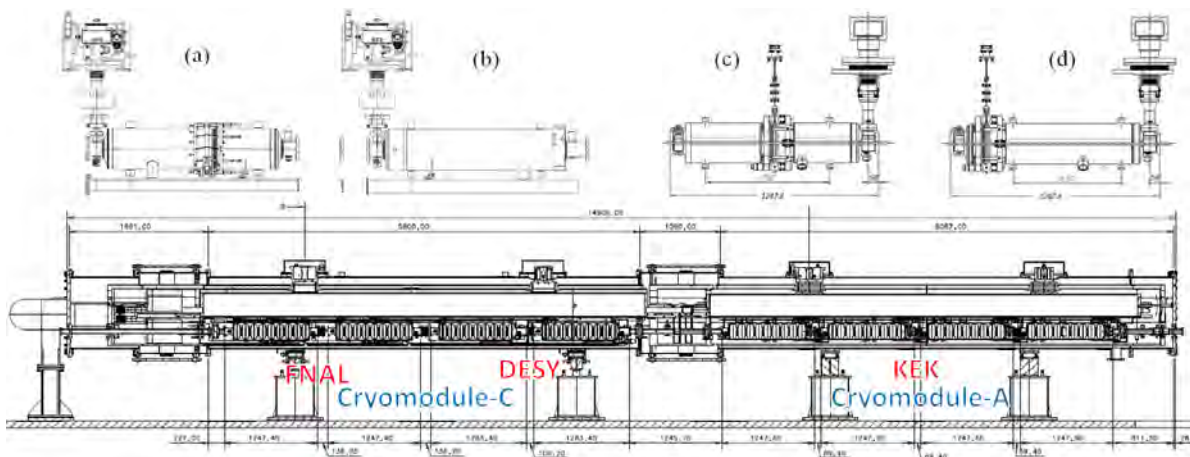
Cross-section view of the S1-Global cryomodule and the cavity package developed by each laboratory. (a) FNAL cavity with blade tuner, (b) DESY cavity with Saclay-type tuner, (c) KEK A-type cavity with slide-jack tuner in the center, and (d) KEK B-type cavity with slide-jack tuner in the end.
